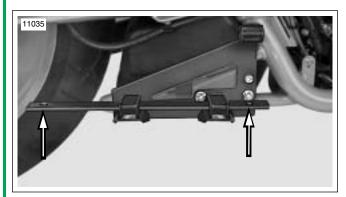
Exhaust Support Fastener Locations (typical) (exhaust system removed)
